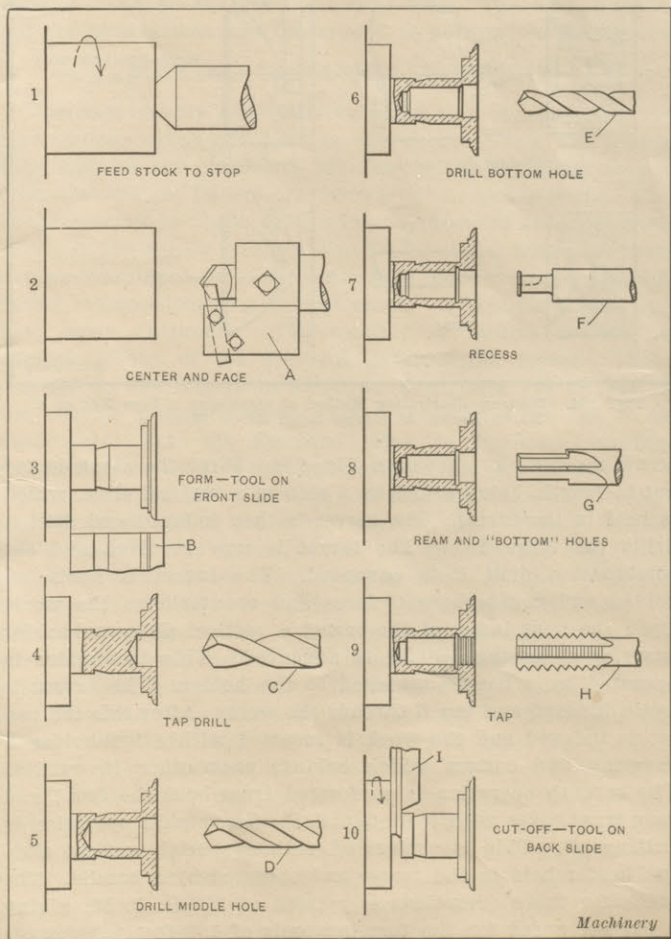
Method of machining Fuse Hammer on a No. 2 Model G Brown & Sharpe Automatic Screw Machine equipped with an Eight-hole Turret
